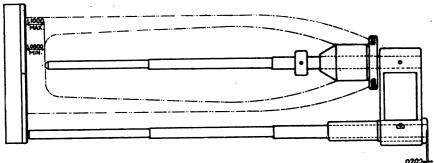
Sketch showing type of gauge used to inspect thickness of base of shell and shrapnel.
